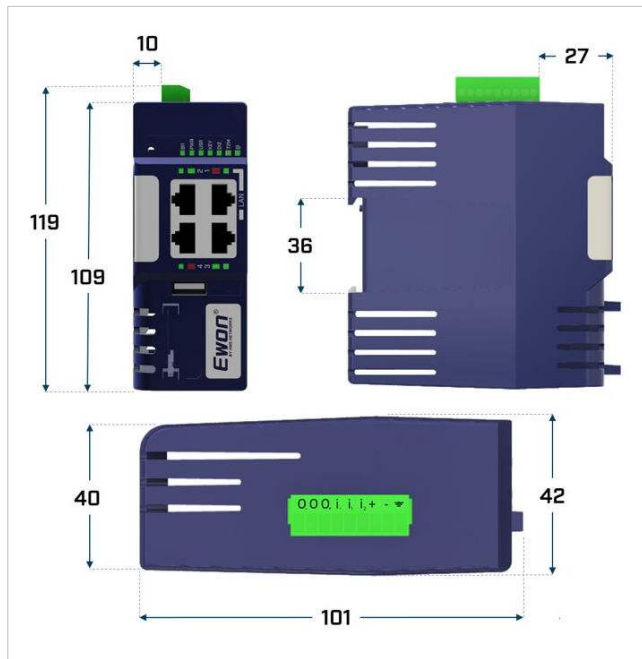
Mechanical dimensions of the Ewon® Cosy+
